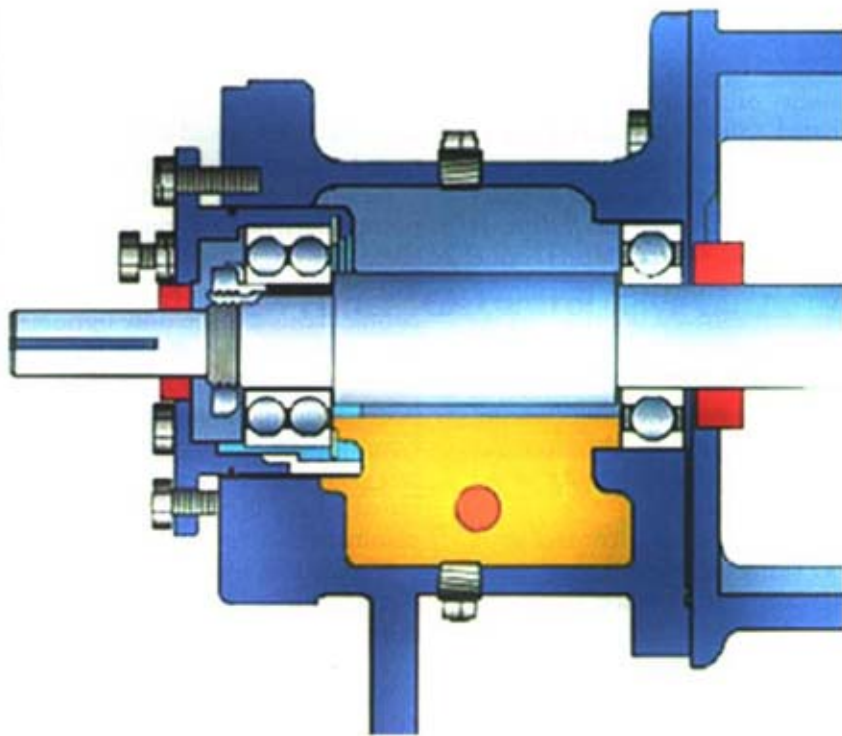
In the pump bearing housing shown here, failure of either the radial or thrust bearing or radial or thrust seal will fail the system.
